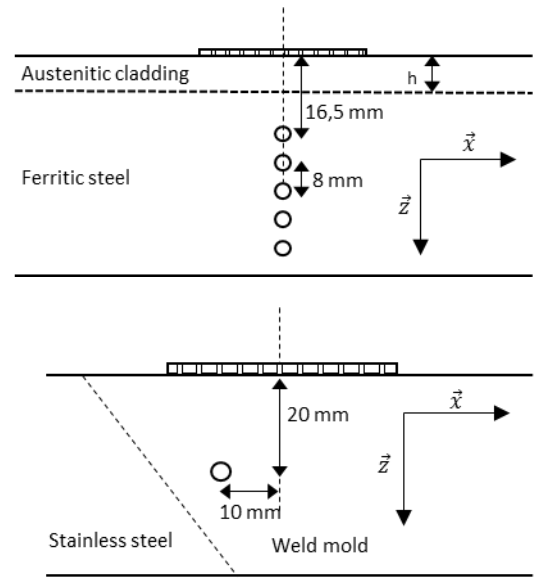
INSPECTION OF A CLADED COMPONENT (TOP) AND AN AUSTENITIC WELD (BOTTOM) WITH A CONTACT LINEAR ARRAY
